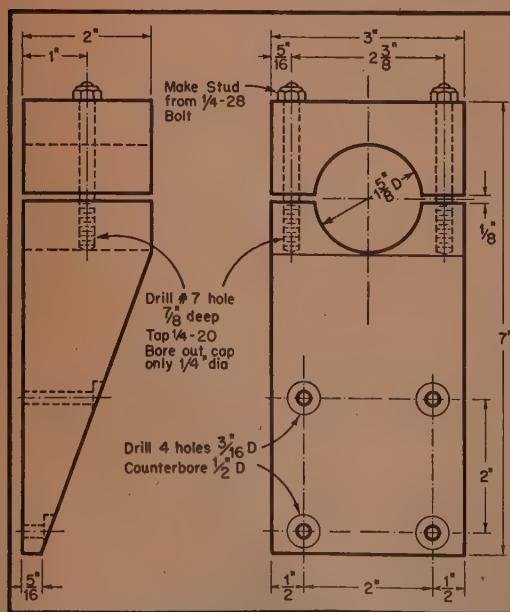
Mechanical details of the micarta clamps used to hold the beam elements.
